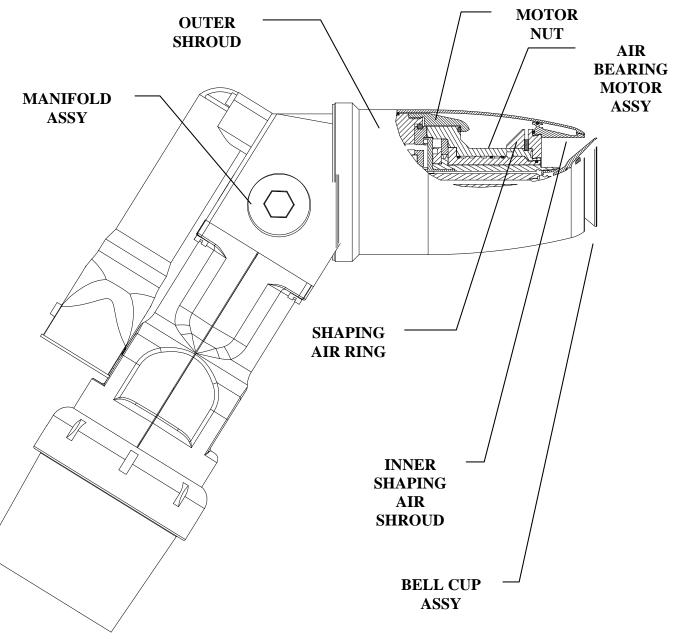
PARTIAL CUT-AWAY VIEW OF THE FS40R
